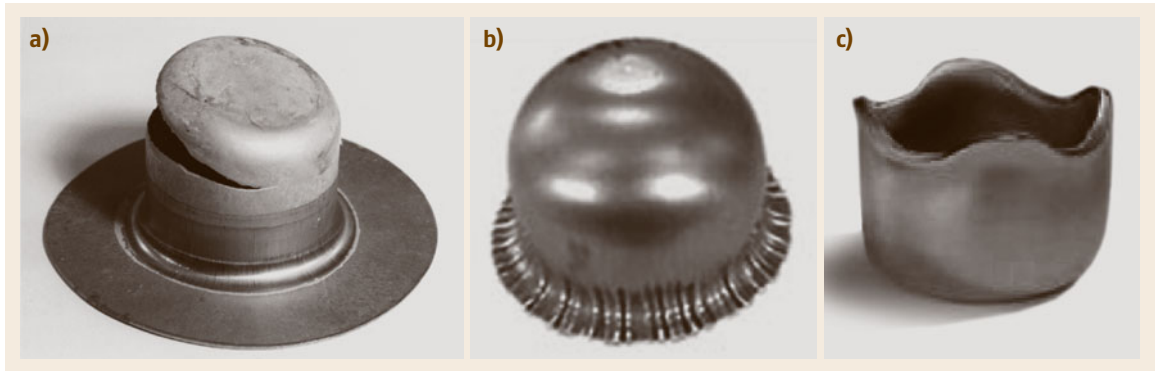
c Typical failure modes in deep drawing: (a) tearing, (b) wrinkling (courtesy T. Altan, ERC), and (c) earing (courtesy Hydro Aluminium Deutschland GmbH)
